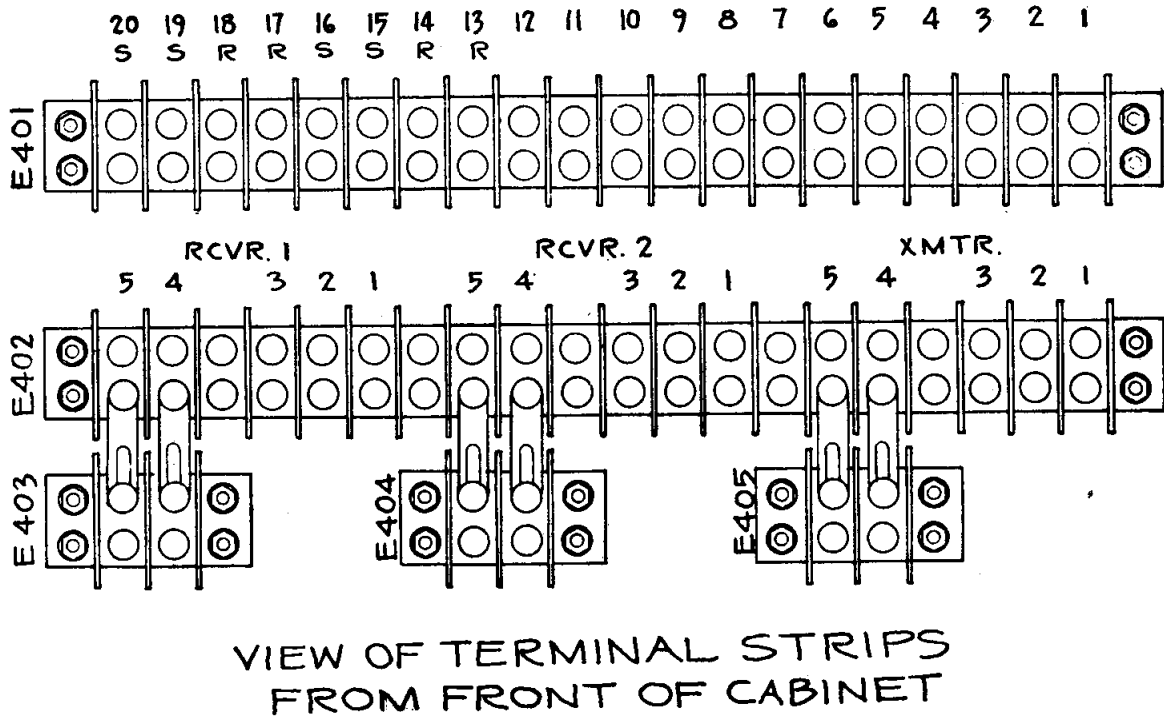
Terminal strip markings on type CQC-23496 remote-control indicator unit. Drawing RE 23A264-A.
